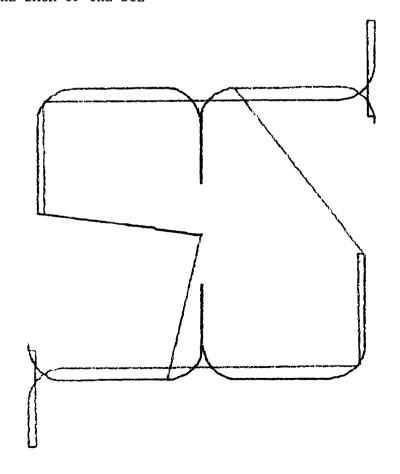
EXAMPLE OF A CUTTER PATH WHEN TOO LARGE A CUTTER SIZE WAS SPECIFIED
